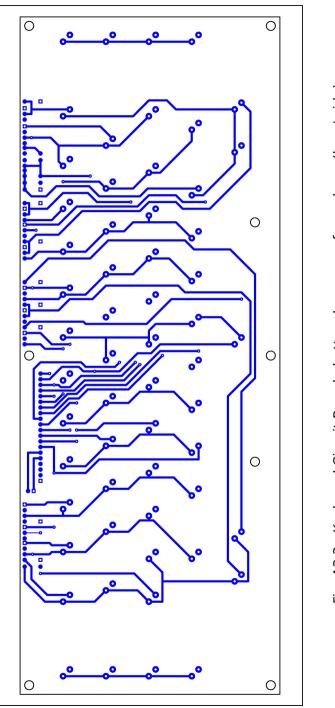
Keyboard Circuit Board - bottom layer seen from above (keys' side)
